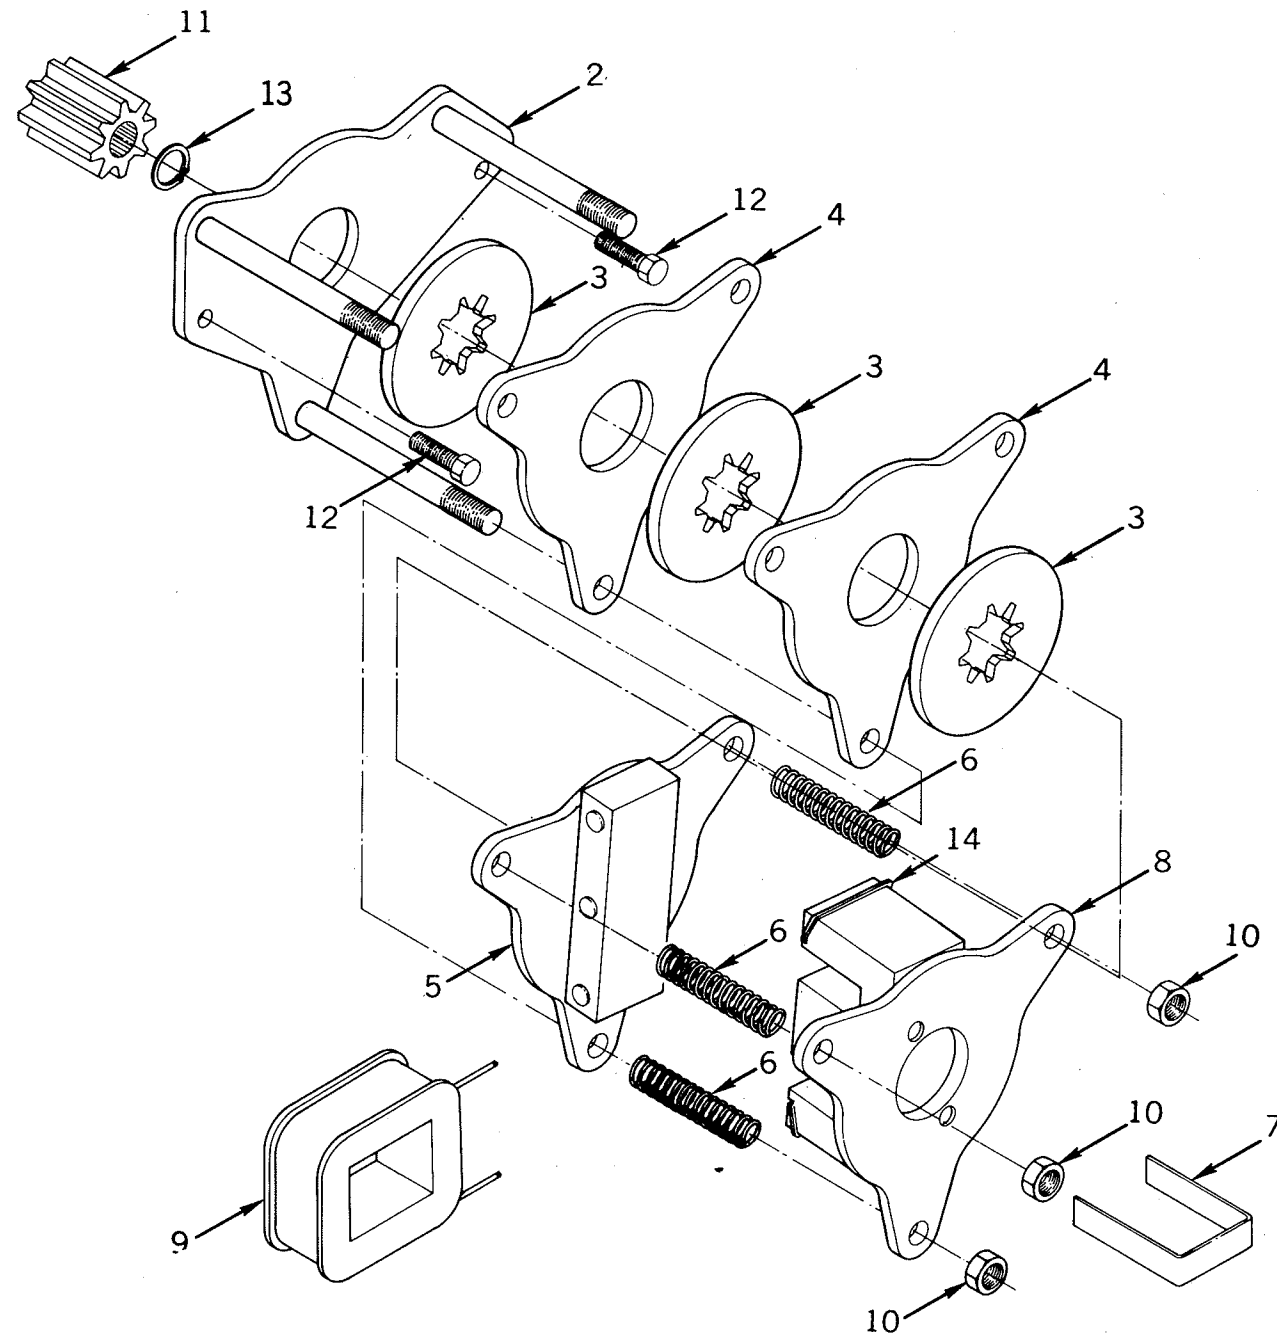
A. BRAKE AND SOLENOID PARTS
